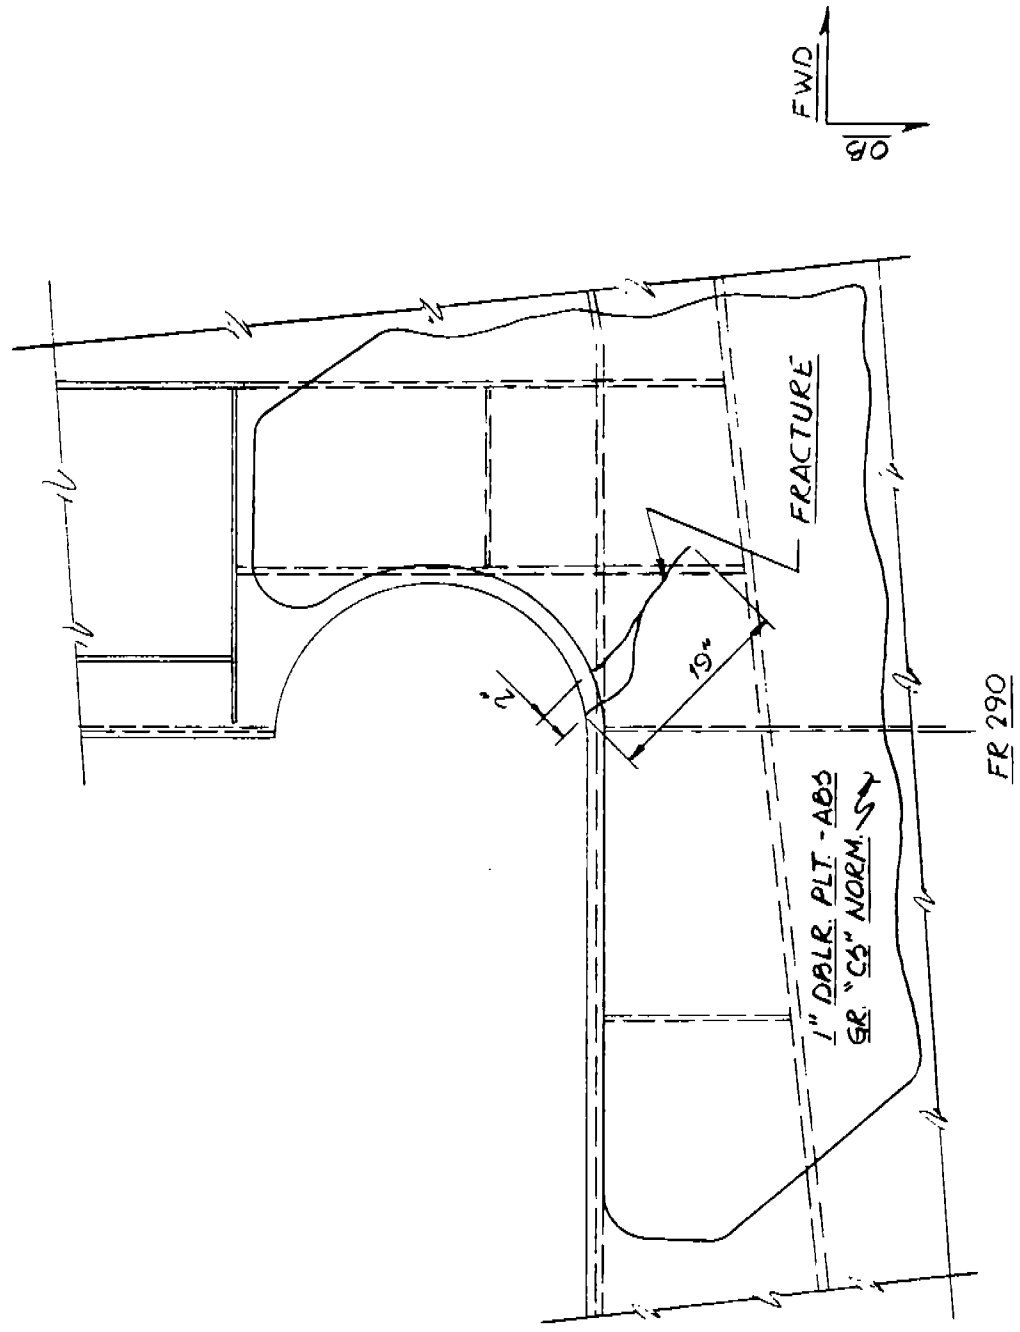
Fracture in the deck and doubler plate at the forward hatch cut out prior to 5/75
